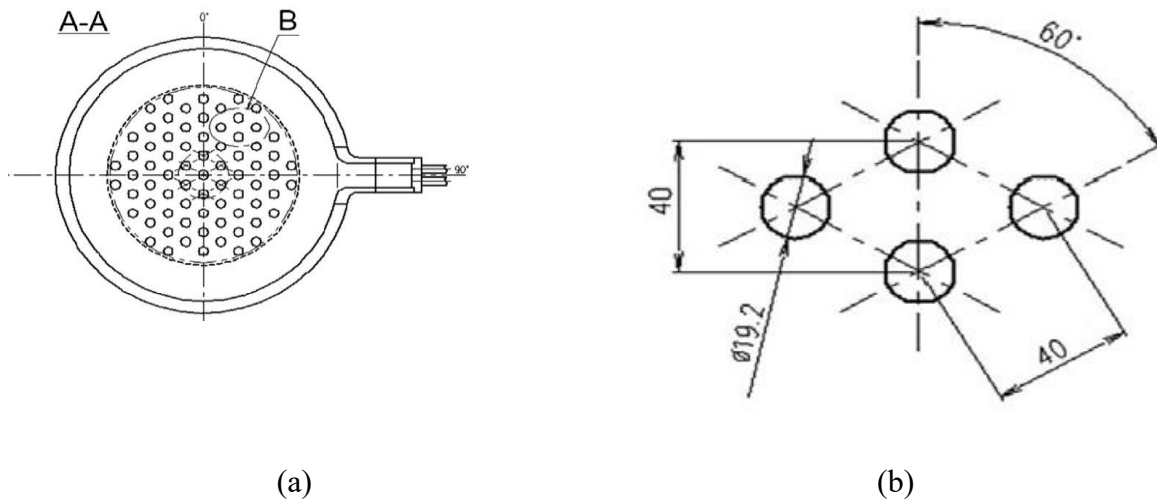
Dimensions and specifications of the holes of tube sheet
